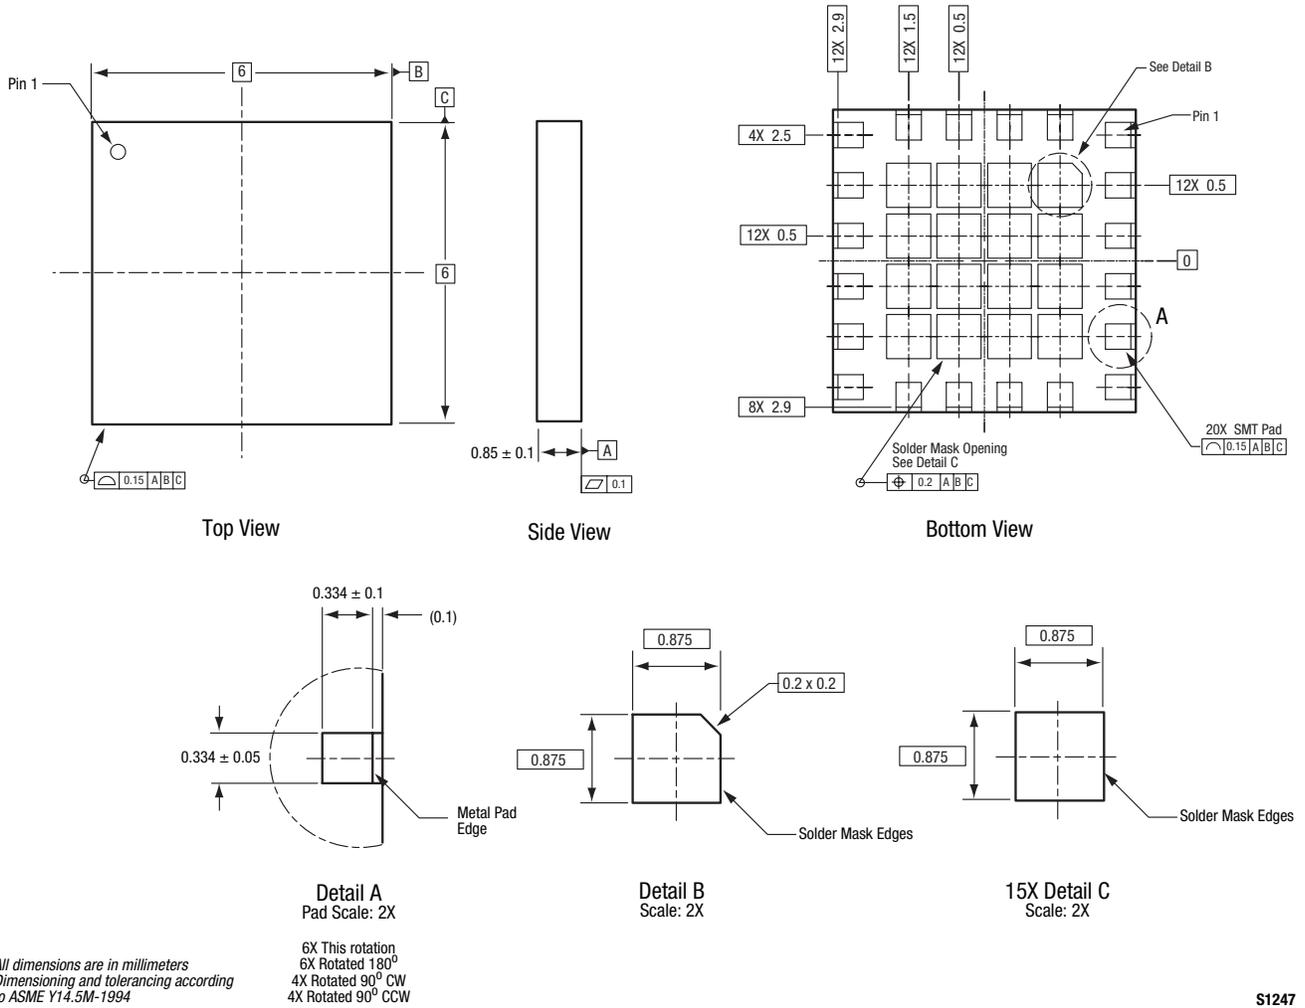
SKY65137 20-Pin MCM Package Dimensions
